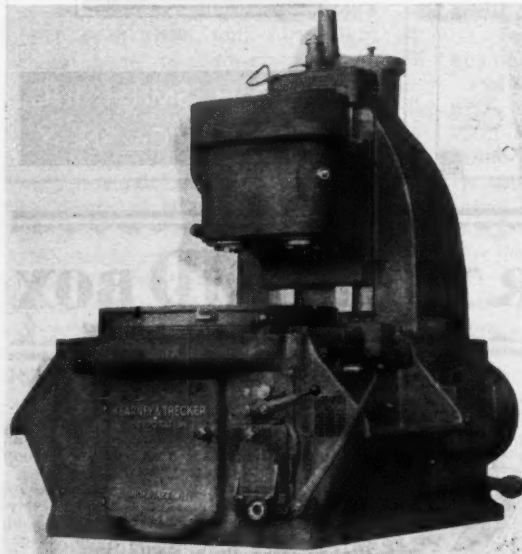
36-In. Rotary-Type Mil-Waukee-Mil with Double-Spindle Head.
